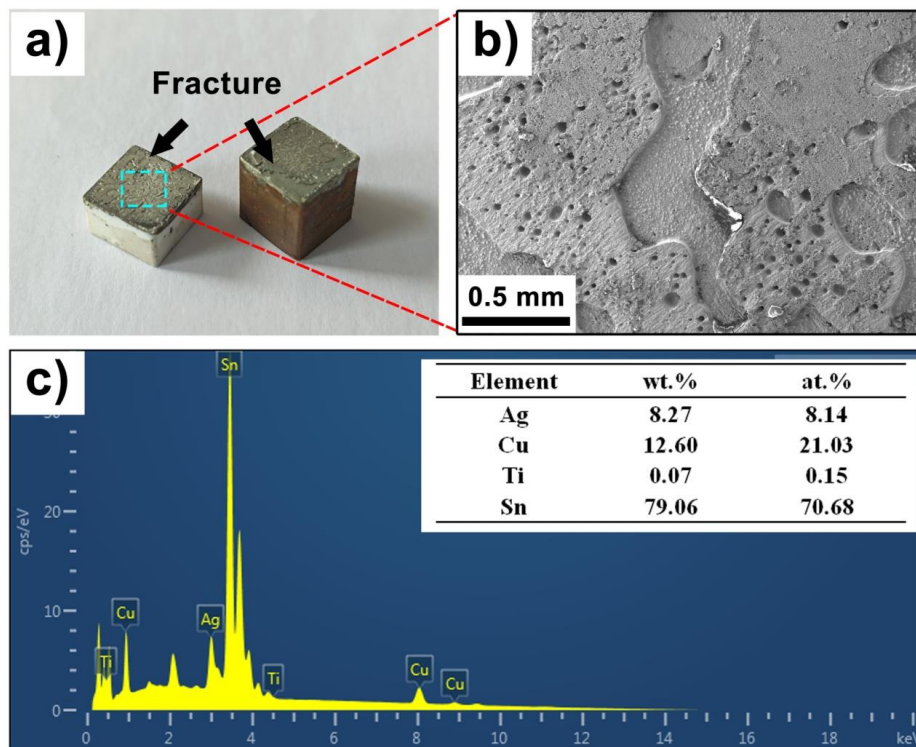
Fracture analysis of Al₂O₃/Cu joint after shearing test.
